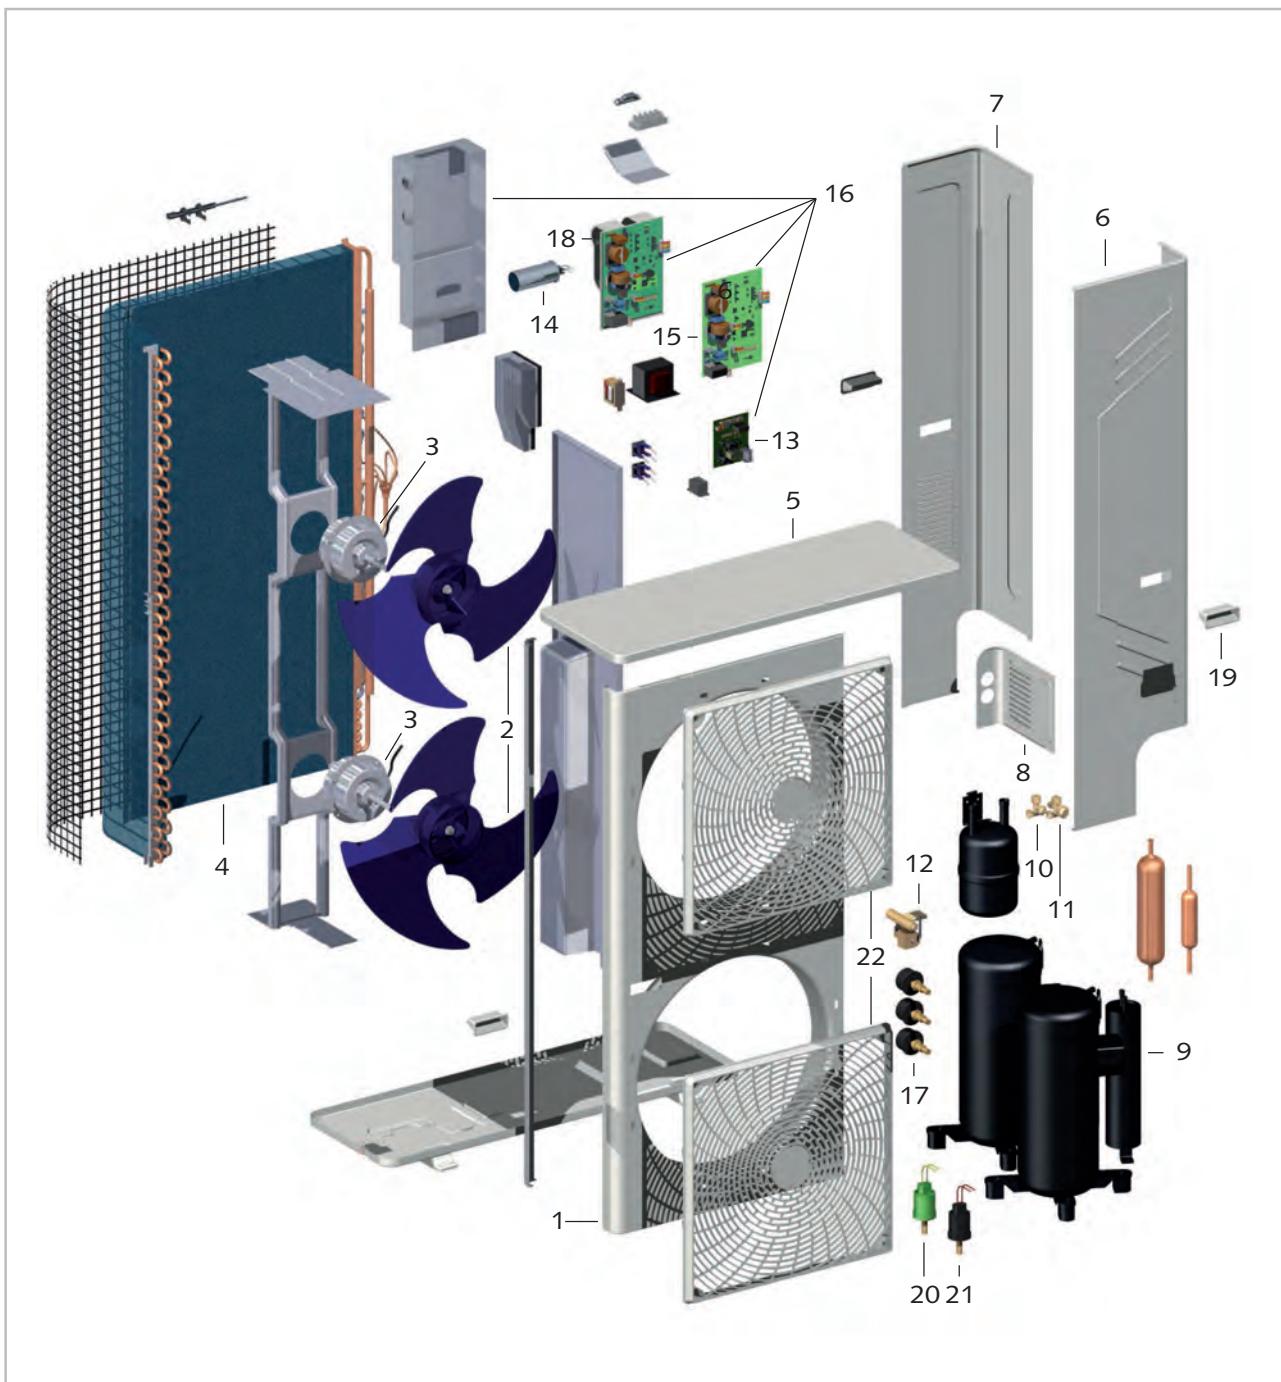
Exploded view of the unit MVV 1200-2000 DC
